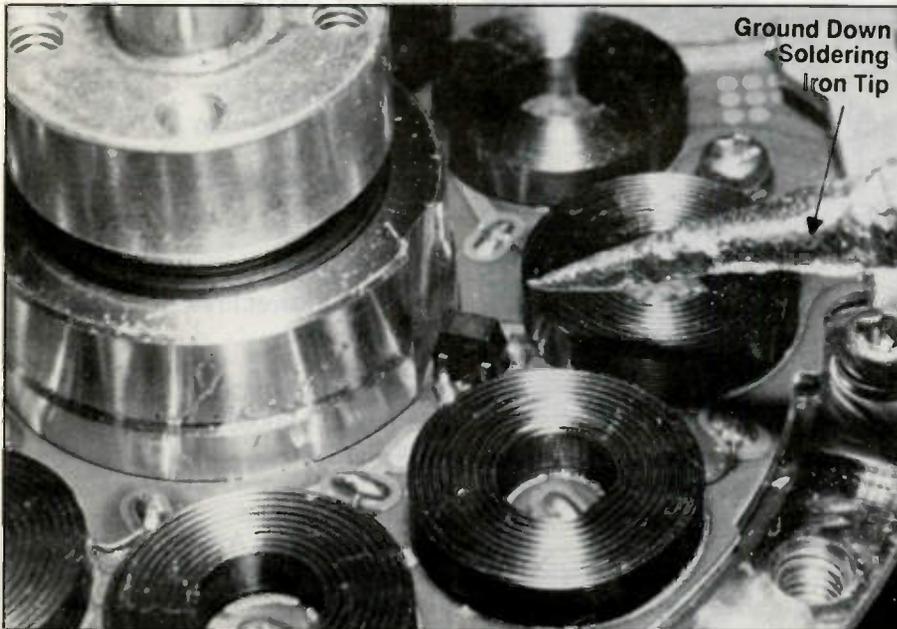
If surface mount desoldering equipment is not available, grind a pencil tip to a fine point, and then tin it with solder.
